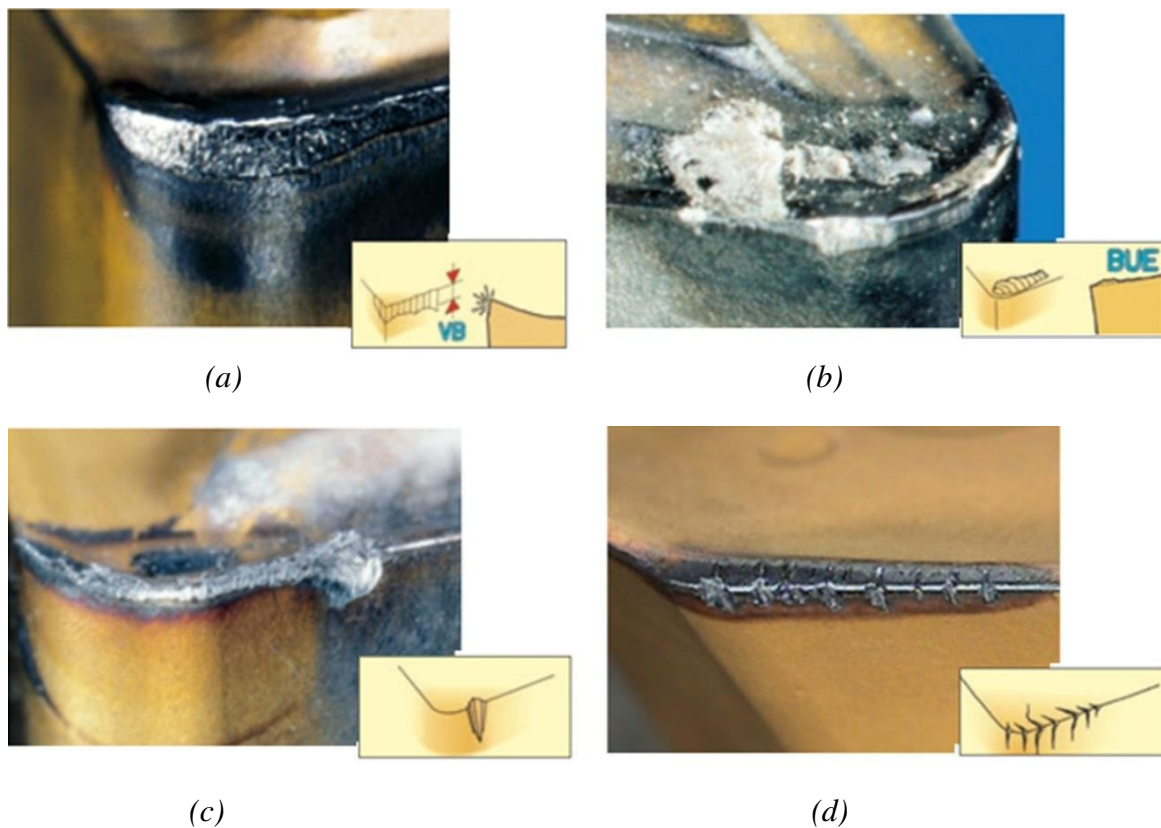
The most common types of wear that occur during SS machining: (a) Flank wear; (b) Build-up edge; (c) Notch wear; (d) Thermal cracks [8]
